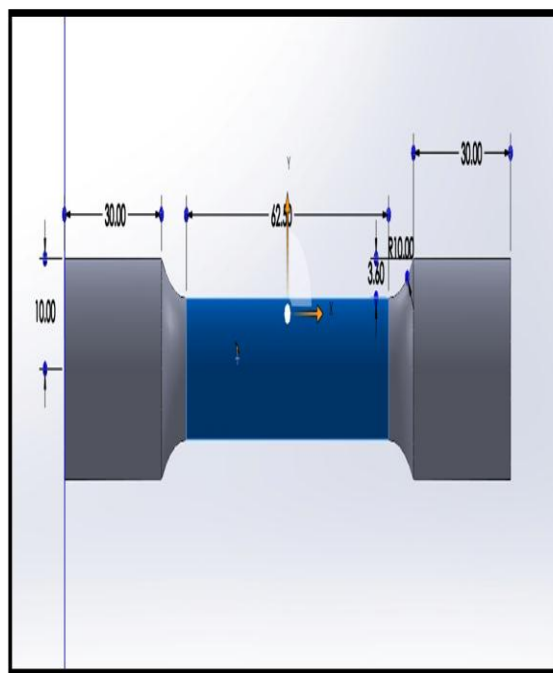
Shows the Dimension Model of Tensile Specimen.
